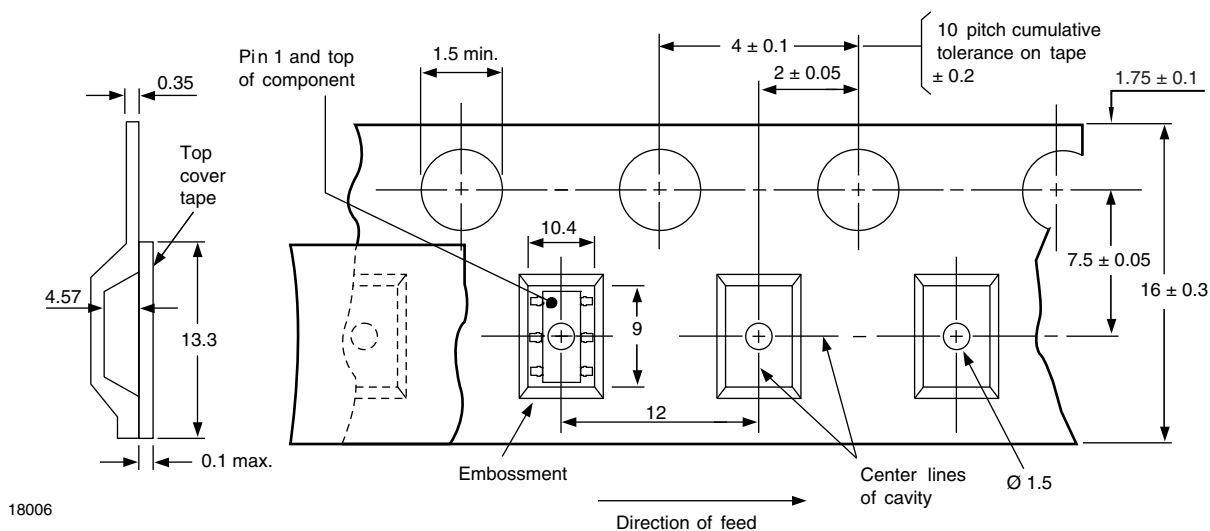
Tape and Reel Packing (1000 pieces on Reel)
